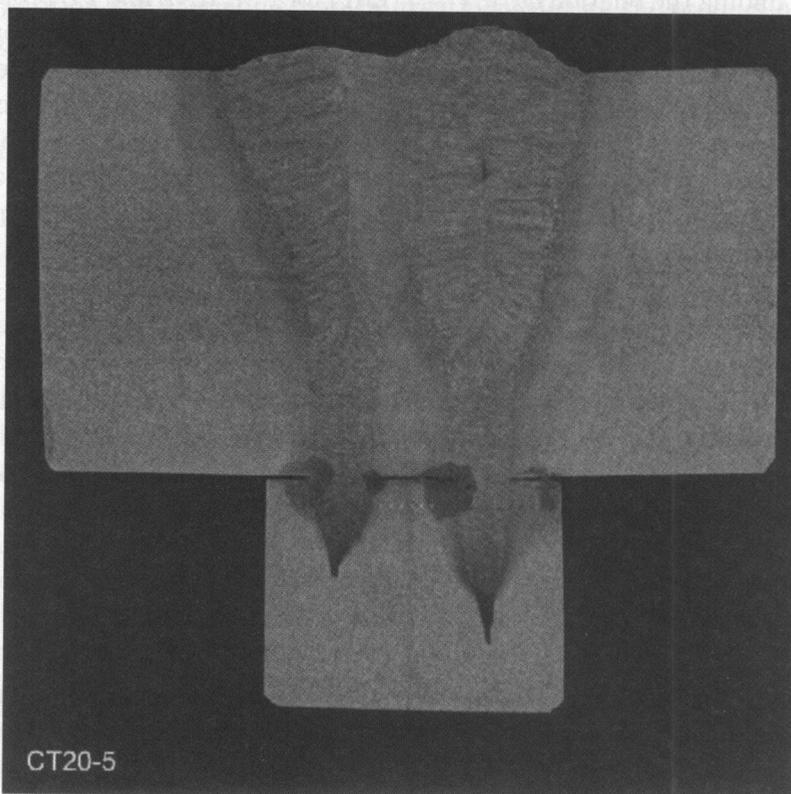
Etched macrosection of 20×15 stake weld.
